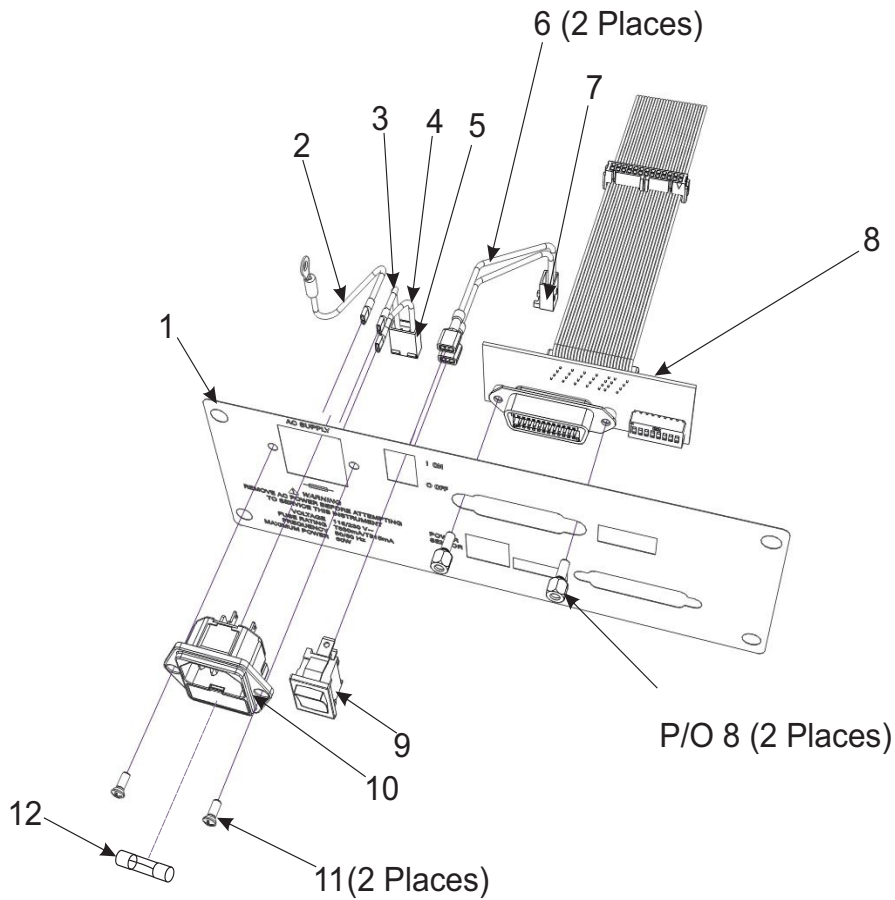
4421 RF Power Meter, Rear Panel Assembly
